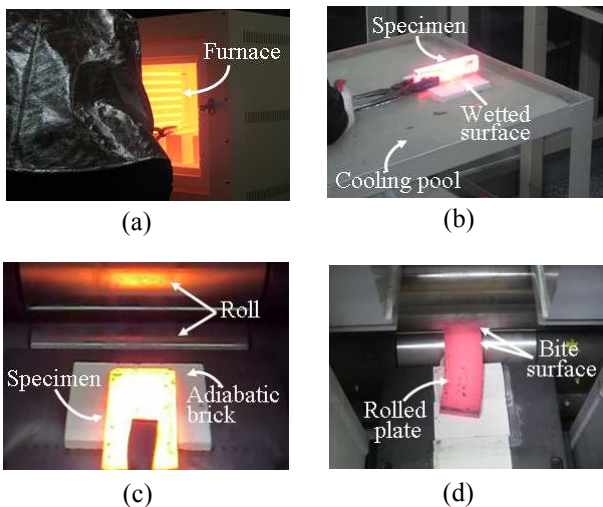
Experimental steps: (a) heating by furnace (b) cooling by water pool (c) biting by rolls (d) width directional bending during hot rolling
